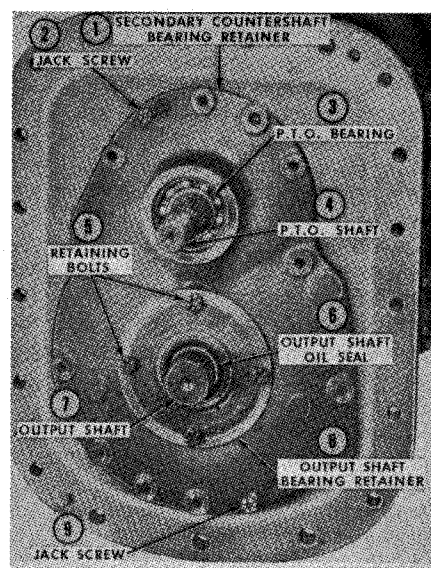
A—View showing transmission rear cover with two retaining cap screws threaded into jack screw holes. Pto shaft is removed with rear cover (secondary countershaft bearing retainer).
